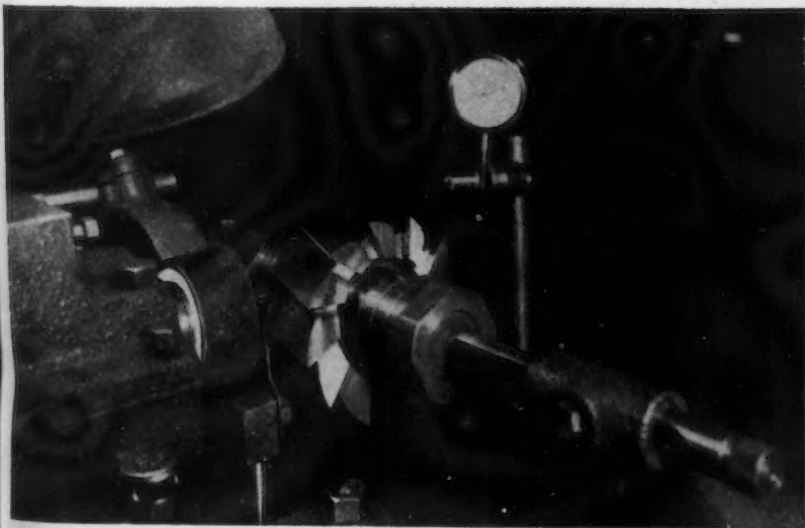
Resinoid bonded cup wheel applied successfully to the all-important finish grinding of the land surfaces of the cutter.
